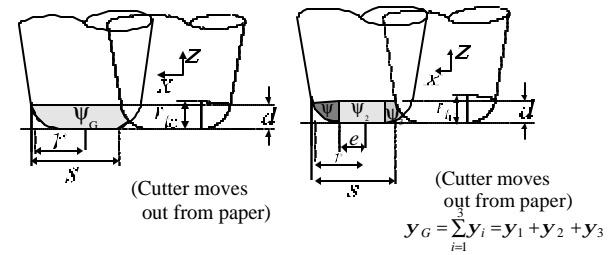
Cutting cross-section y_f for a taper-endmill machining a part
